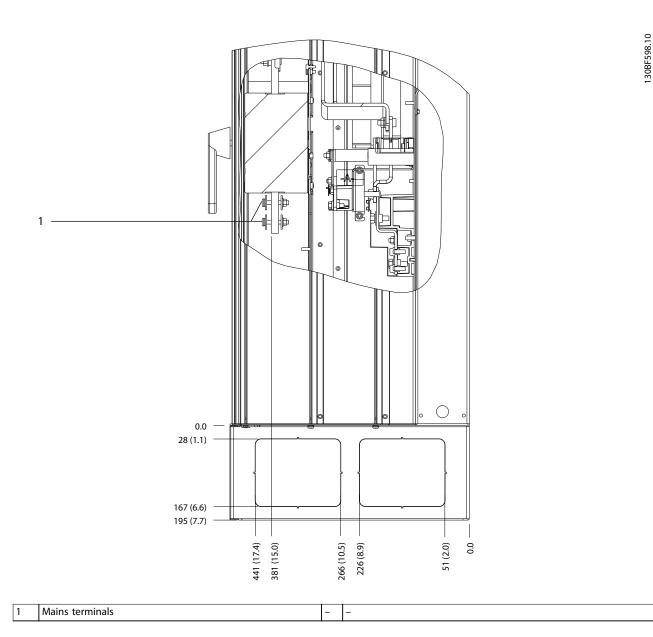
Terminal Dimensions for E1 with Disconnect (380-480/500 V Models: P315; 525-690 V Models: P355-P560), Side View
